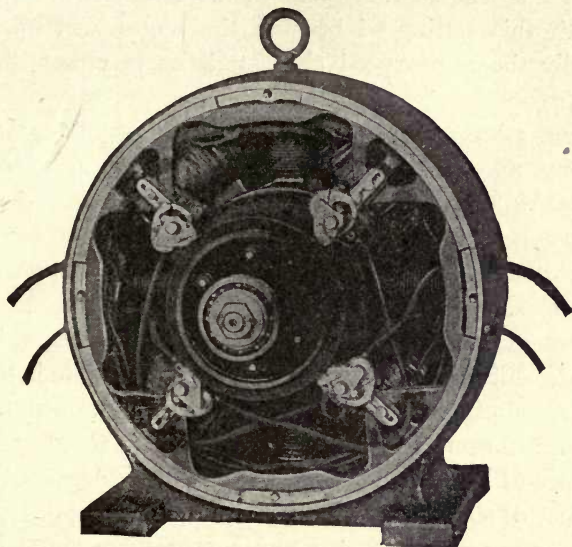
INTERPOLAR MOTOR — FRONT BEARING REMOVED.
